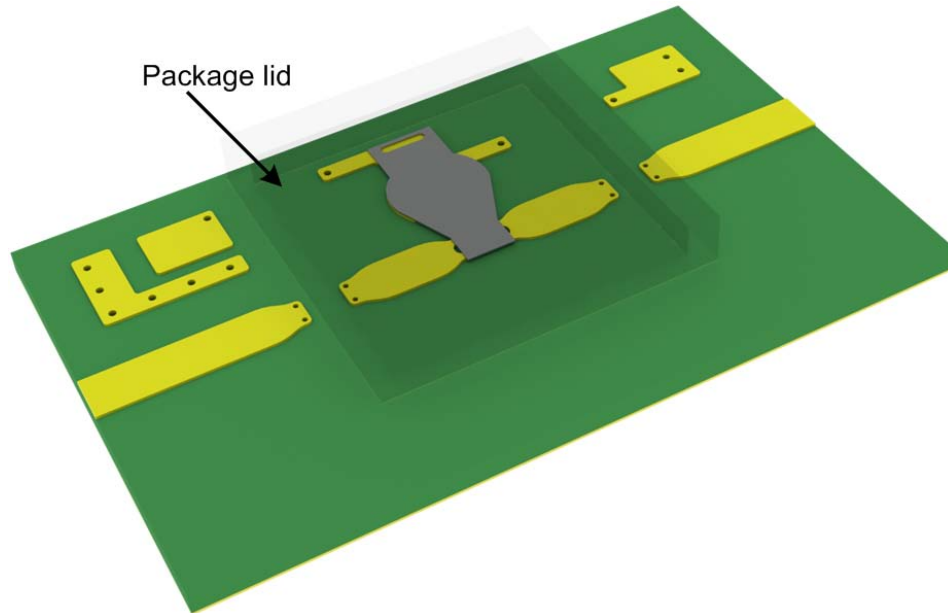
Assembled, singulated and packaged micro-relay. The package lid is shown in transparent.
